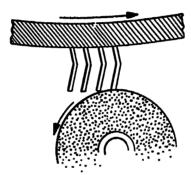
GRINDING ACTION IN-VOLVED IN CARD CLOTHING GRINDING
